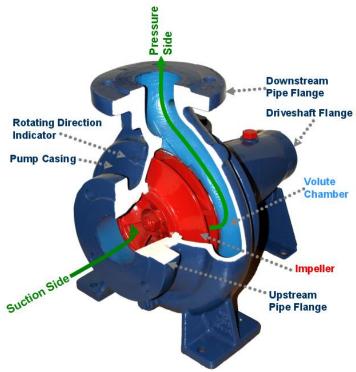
Labels for an end-suction centrifugal pump with an enclosed impeller. A coupling and motor are attached to the driveshaft to turn the shaft and impeller.
